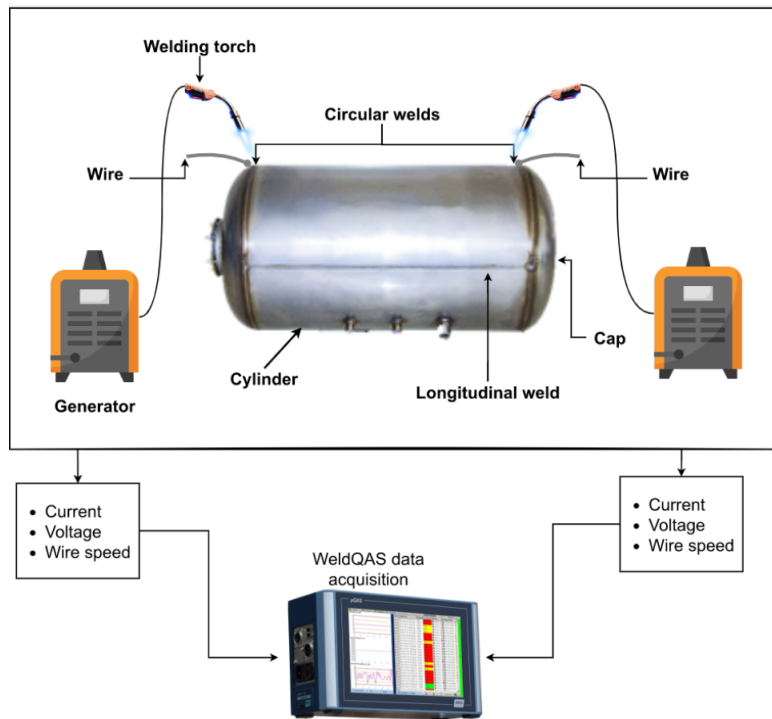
Illustration of the setup of the circular welding process.
